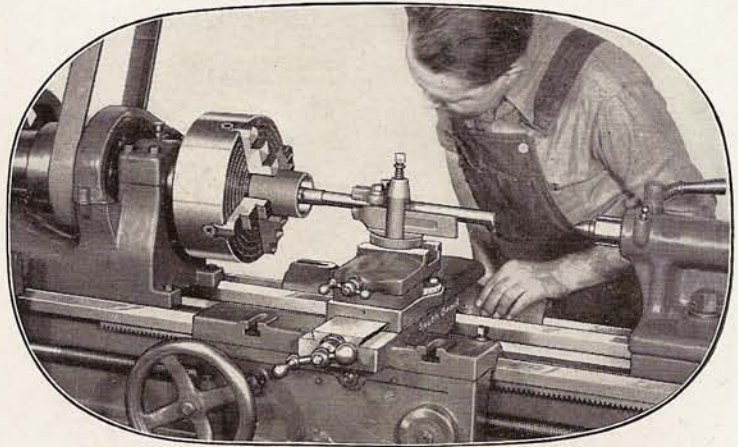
Making a Bushing in a Chuck in the 16-inch South Bend Lathe.
